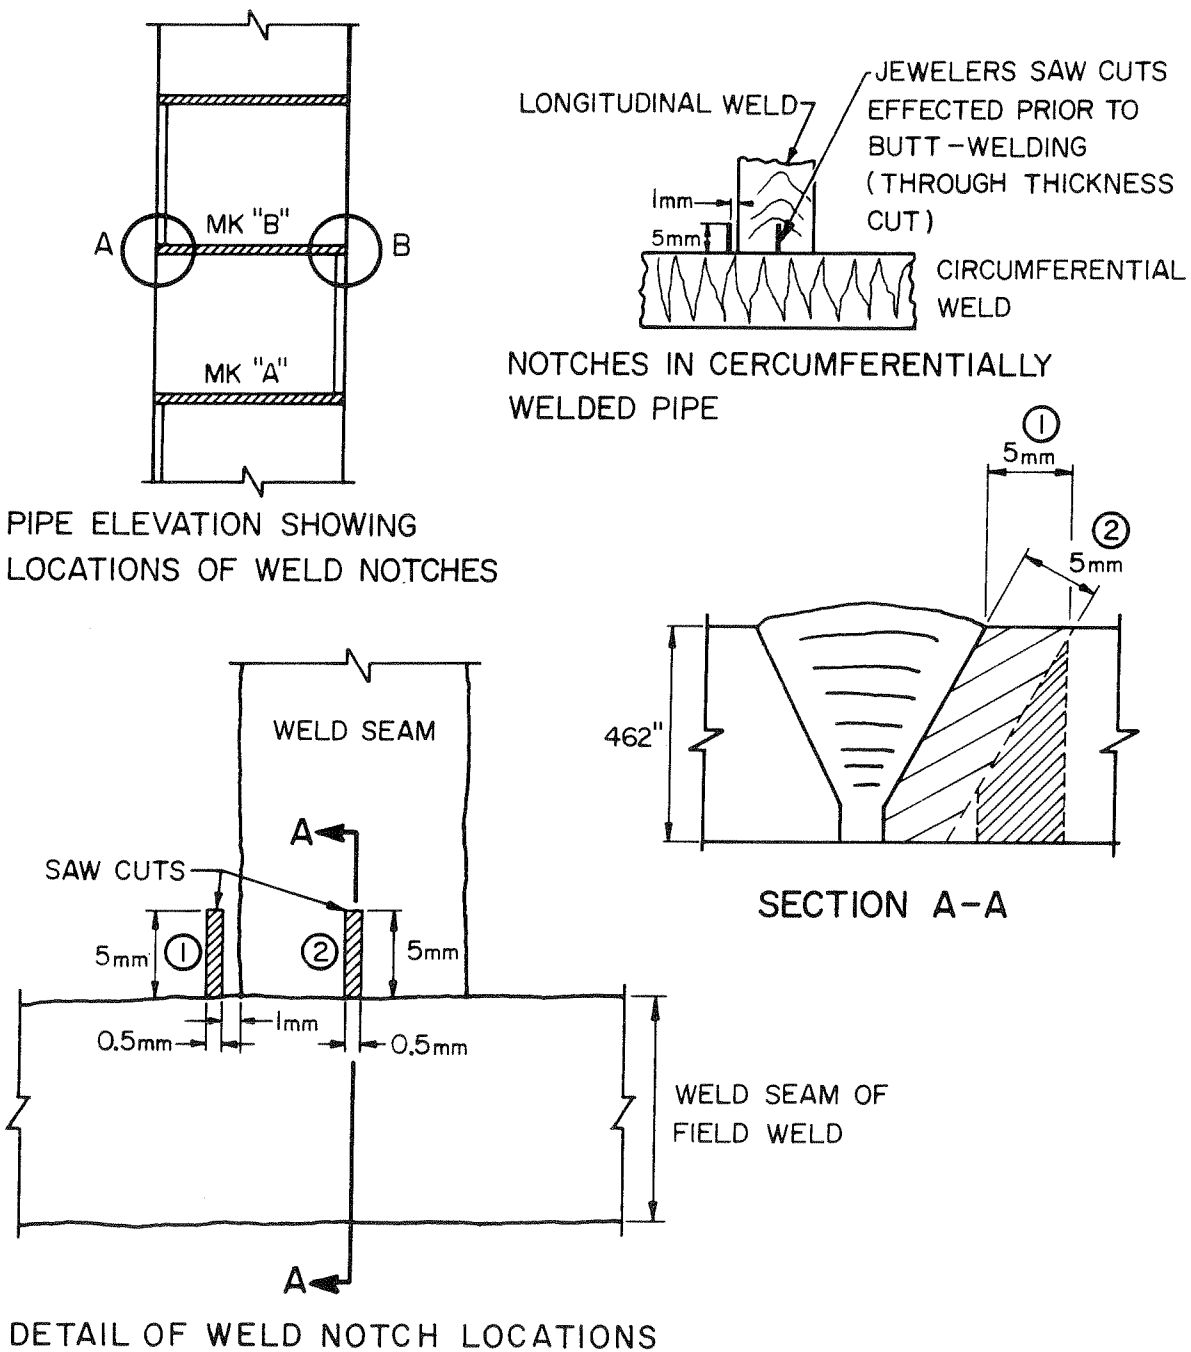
DETAIL OF NOTCHES IN CIRCUMFERENTIALLY WELDED PIPE SPECIMEN
